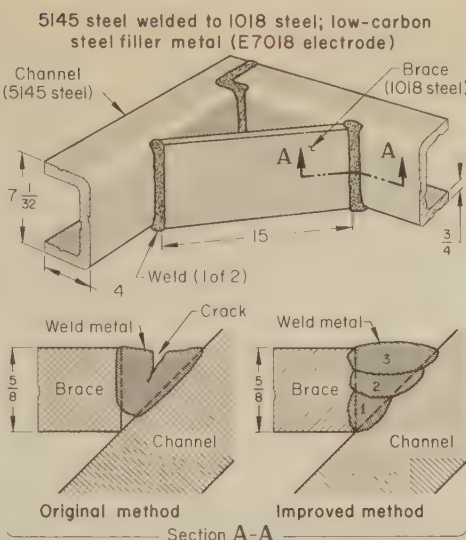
Corner of a heavy-duty truck frame, showing brace that was shielded metal-arc welded without preheating. Change from single-pass to three-pass welds eliminated cracking. (Example 198)
